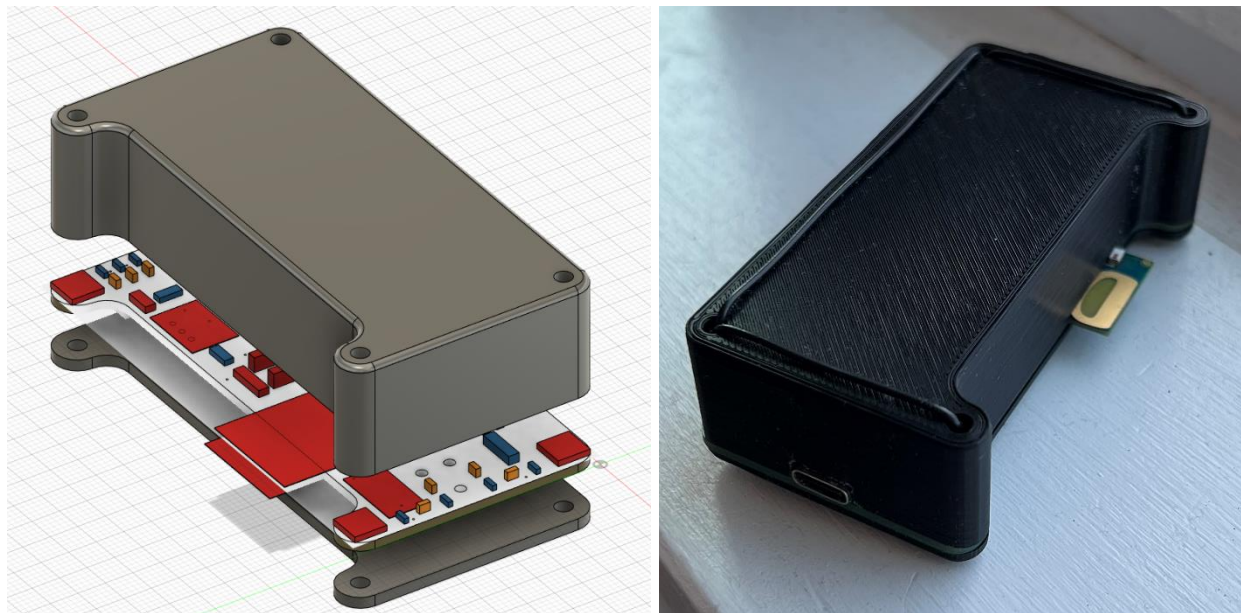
3D CAD model of enclosure and final 3D printed version.
